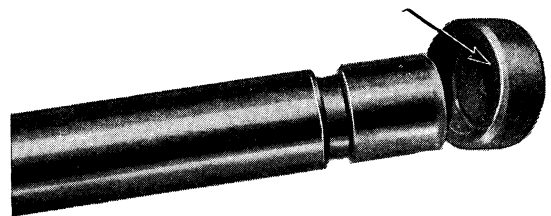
Detail of a valve stem and differential thickness cap for tappet clearance adjustment on engine 118 B.000.
